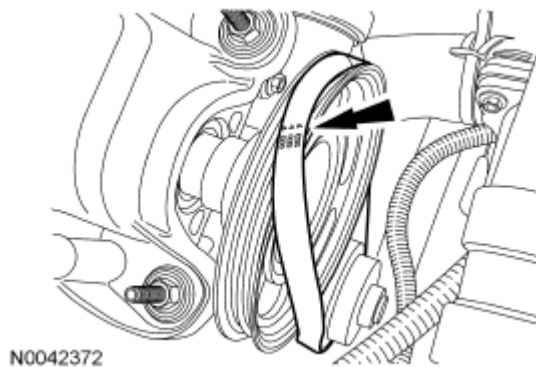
Locating Coolant Pump Belt On Coolant Pump Pulley
